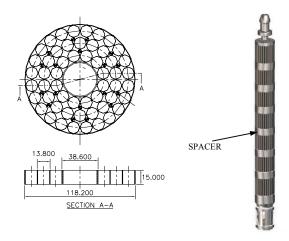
Cross-Sectional View of Spacer for 54-rod Cluster.
